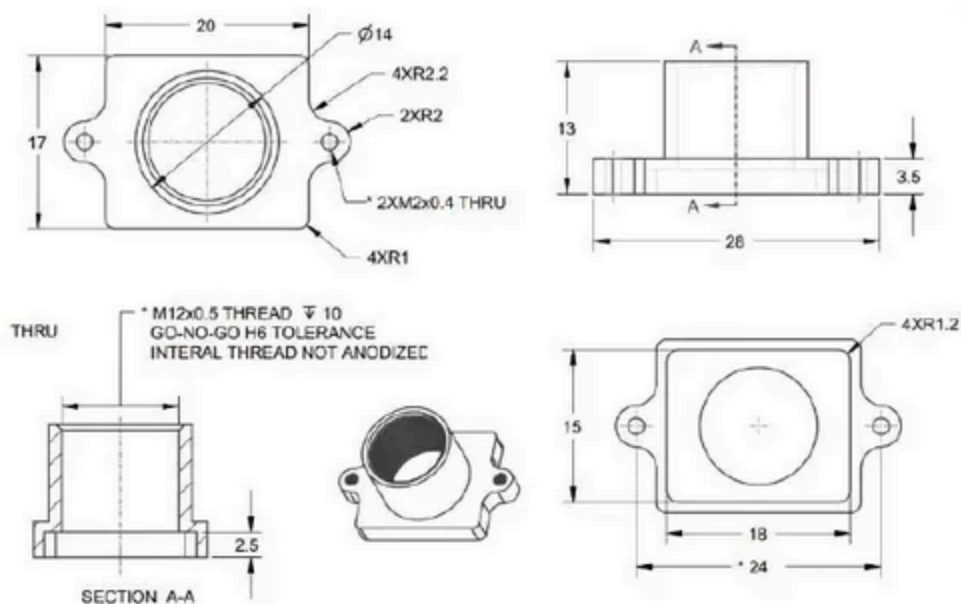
S-Mount Metal Lens Holder Outline Dimension
